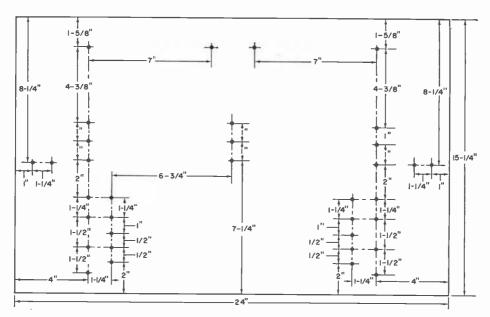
Holes drilled through demonstrator board are for machine-hard-ware mounting screws and terminals.
